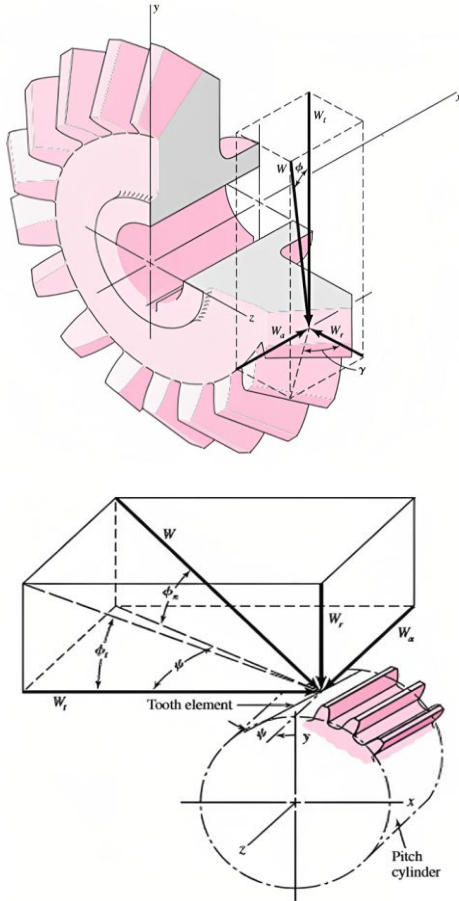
Tooth mesh forces, a) Bevel gear tooth forces and b) Tooth forces acting on a helicoidal gear [15].
